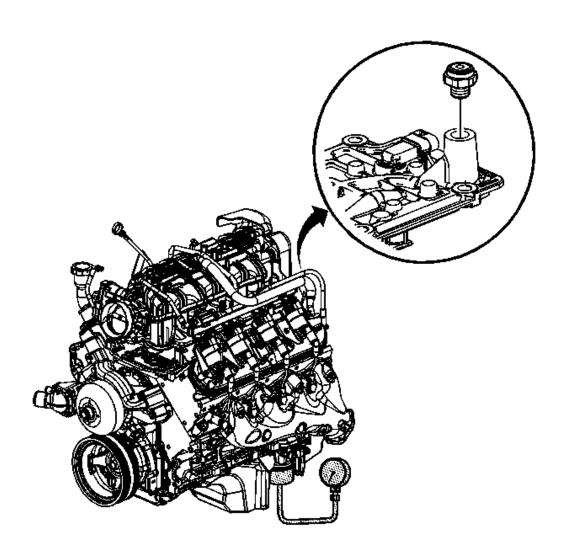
View Of Oil Pressure Sensor Courtesy of GENERAL MOTORS CORP.
